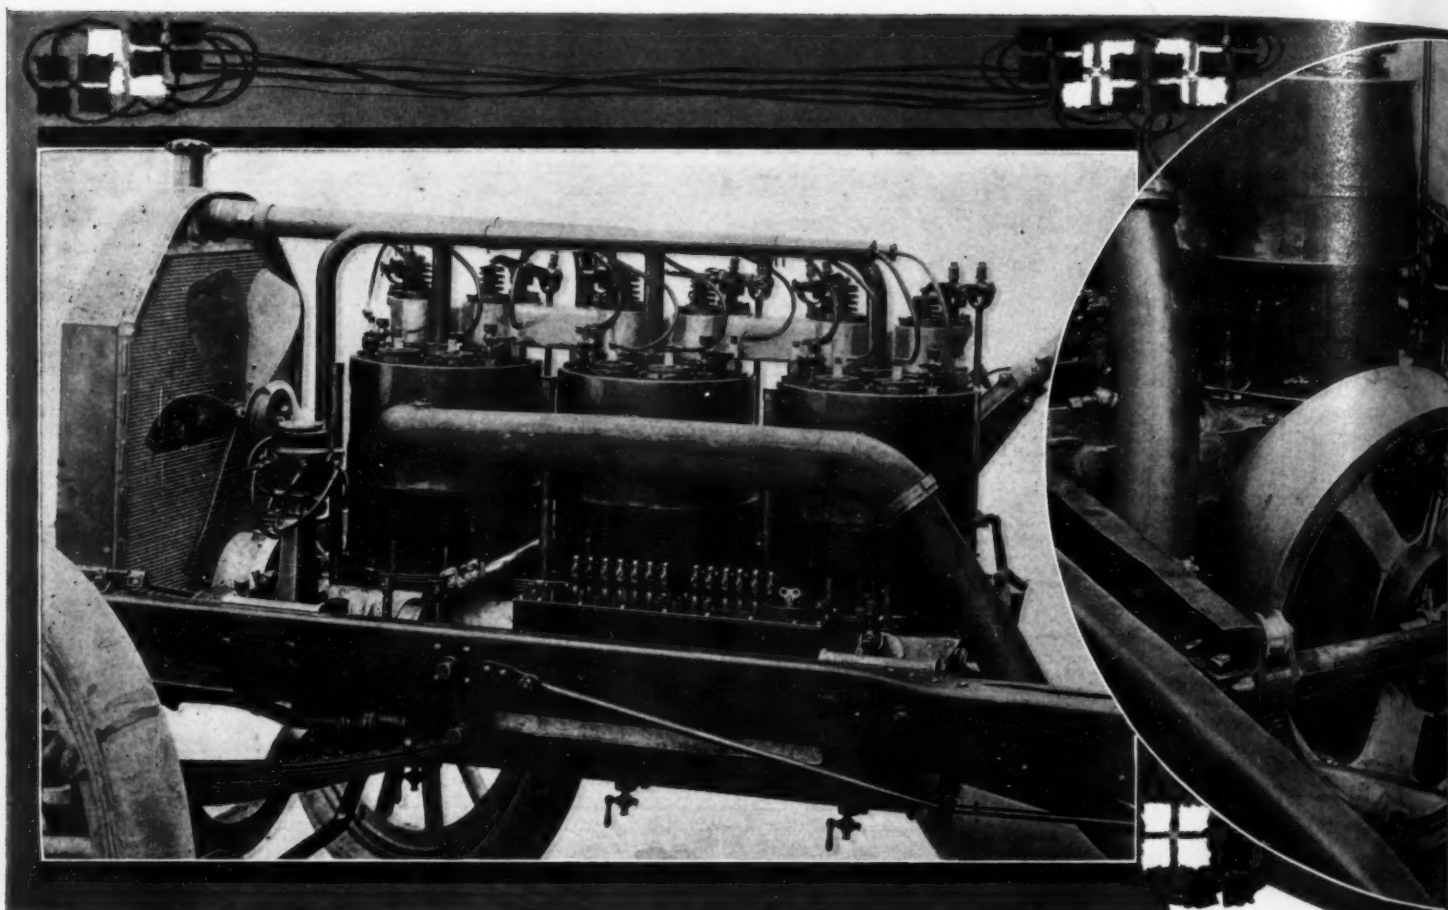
Left-hand side of engine showing lubricator, timer and other details
